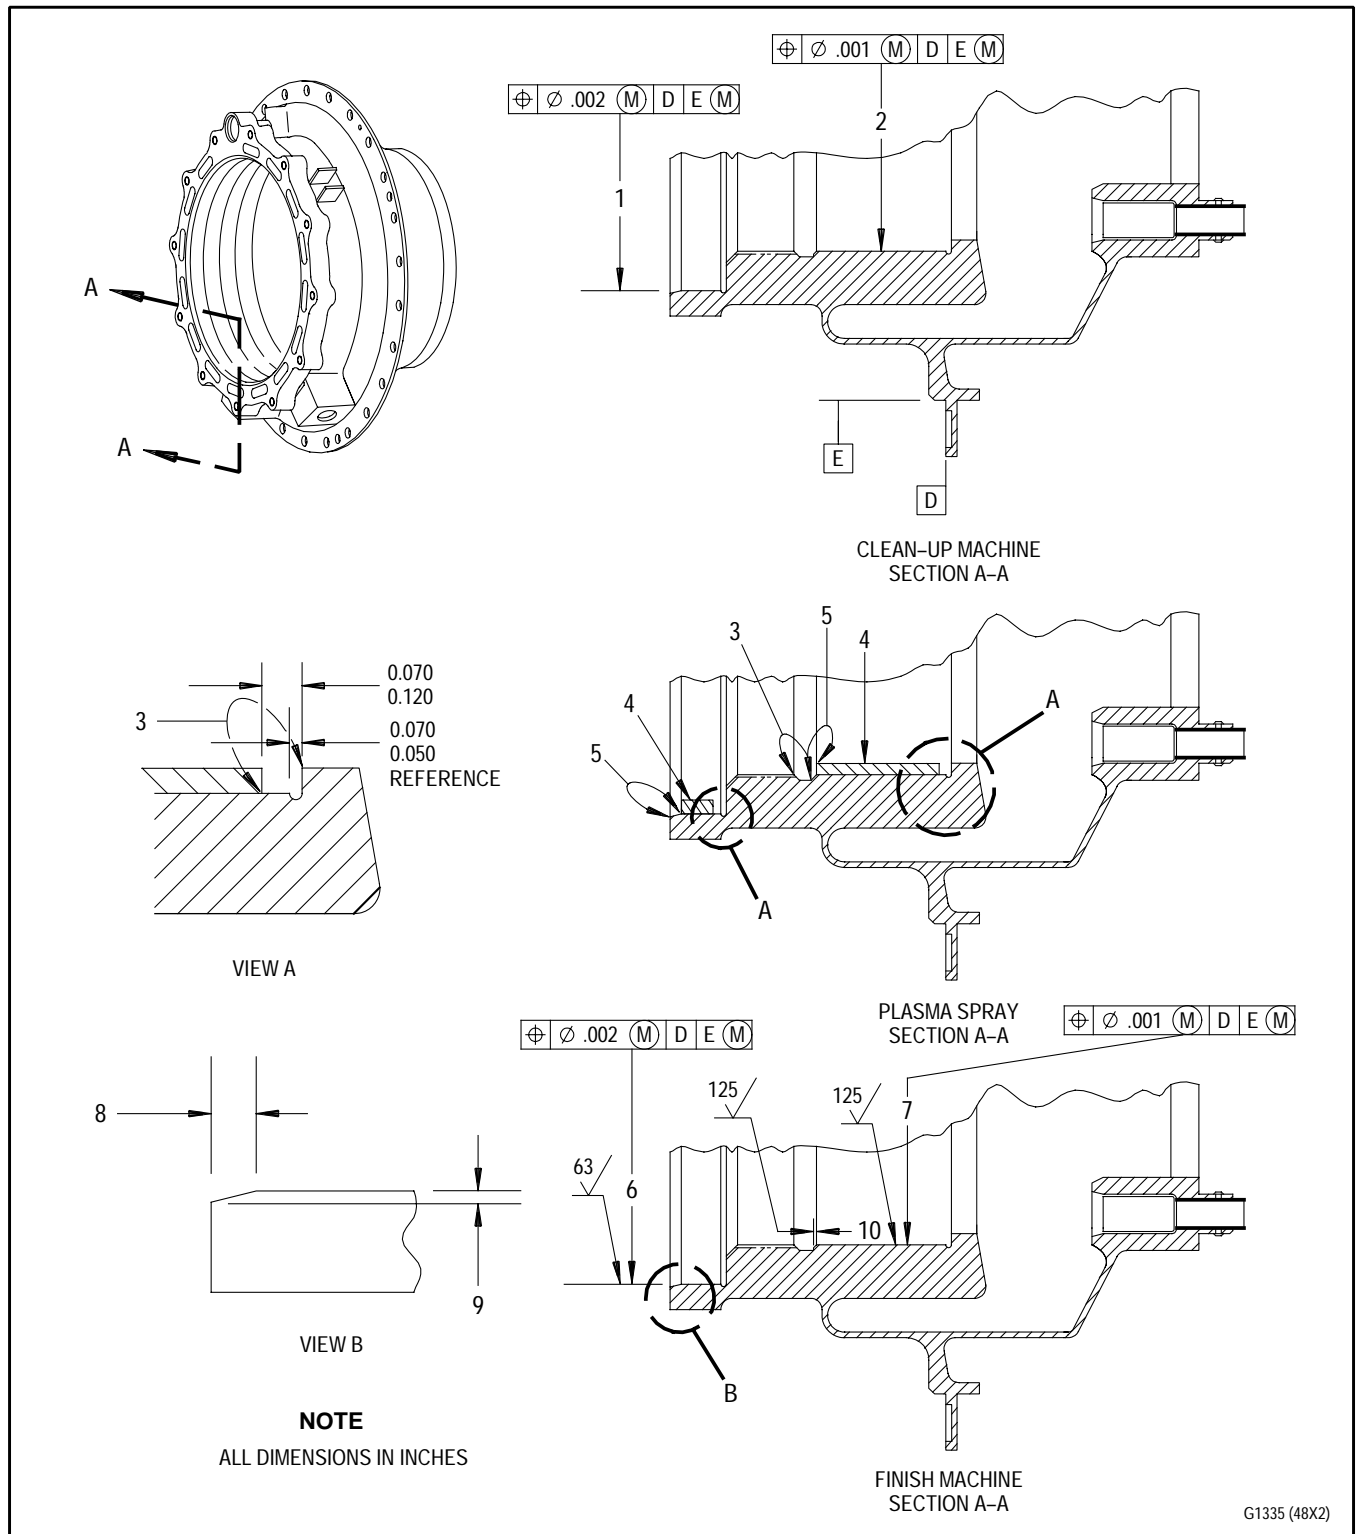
No. 1 Bearing Housing Assembly - Inner Snap Diameters Repair
